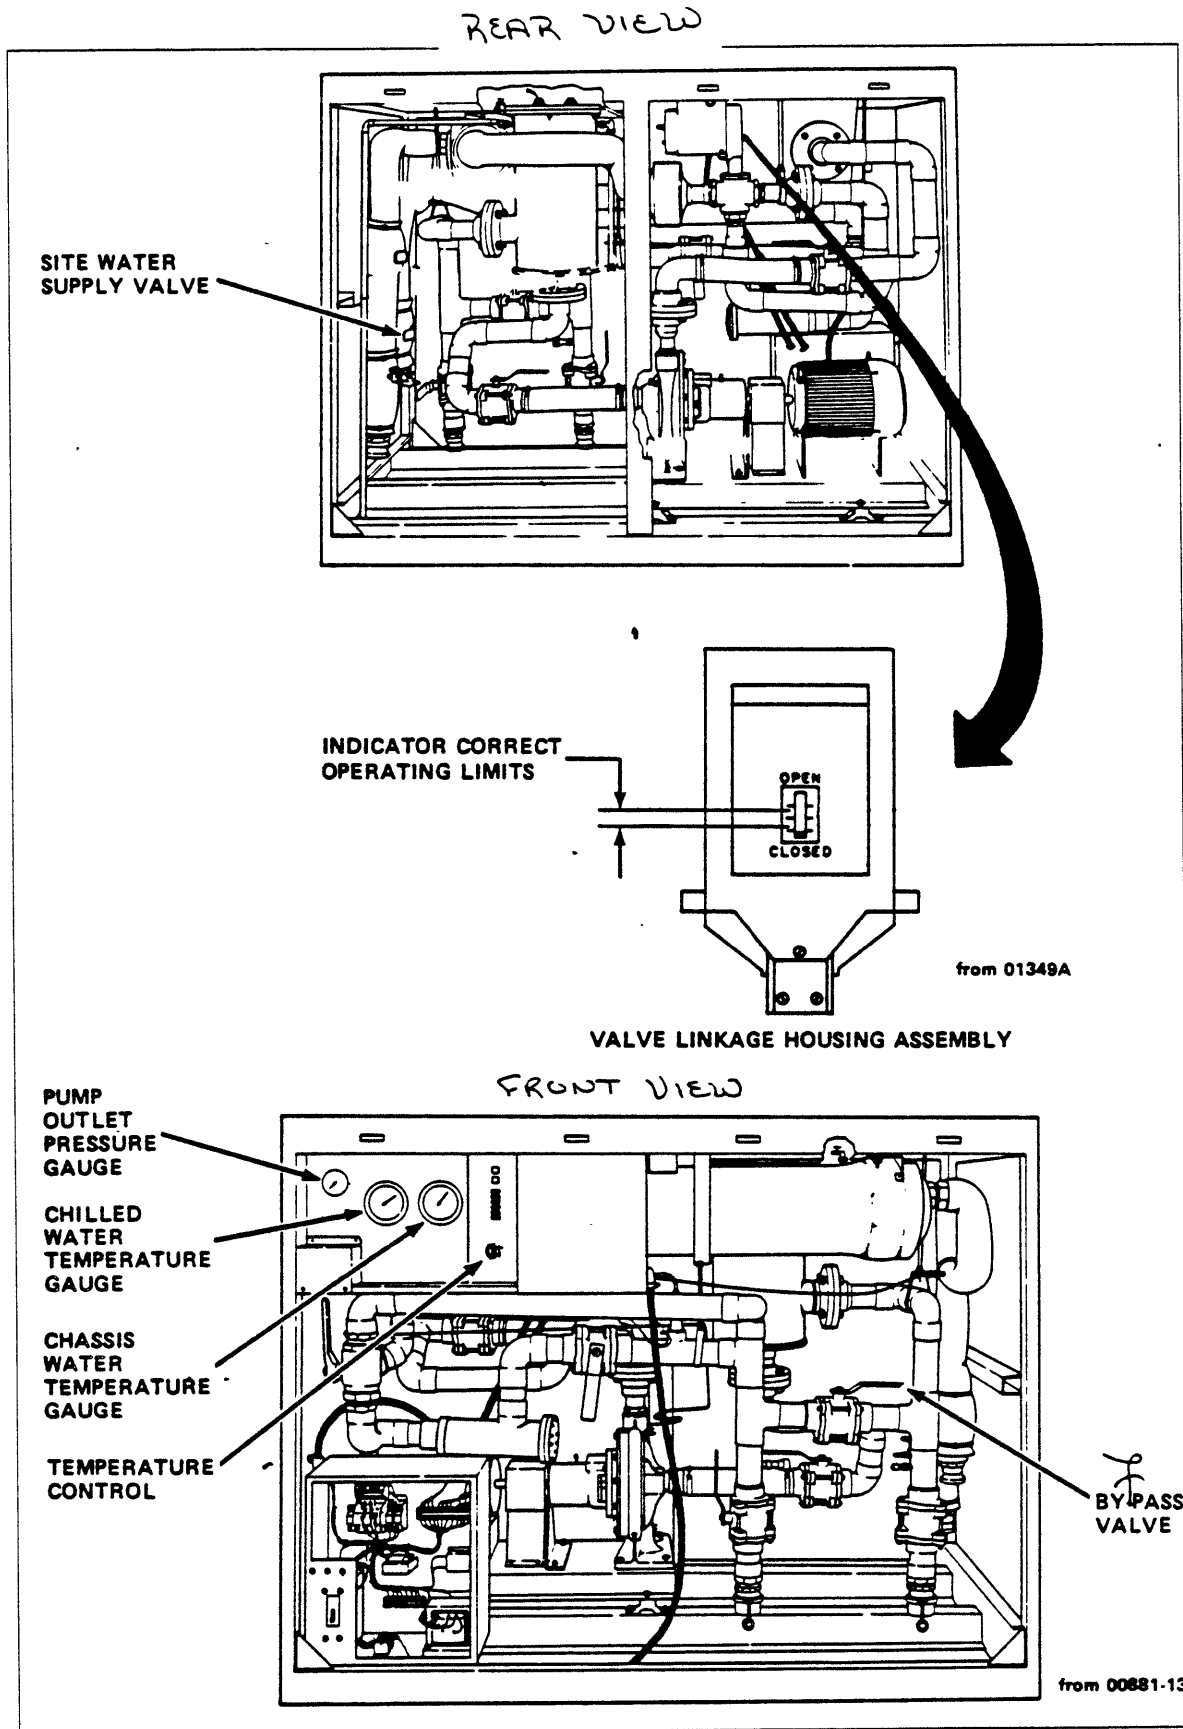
GH252-A WCU Mixing Valve Indicator
